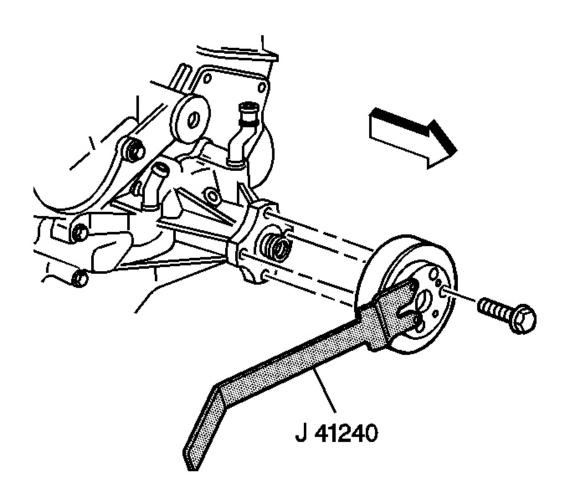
View Of Fan, Water Pump Pulley & Bolts Courtesy of GENERAL MOTORS CORP.
